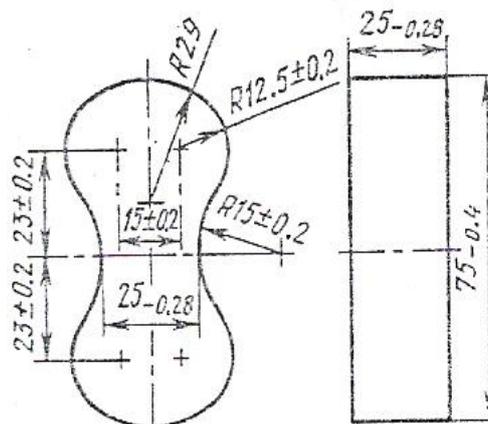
Design shape of the core tensile strength test specimen (all dimensions are in millimetres).
